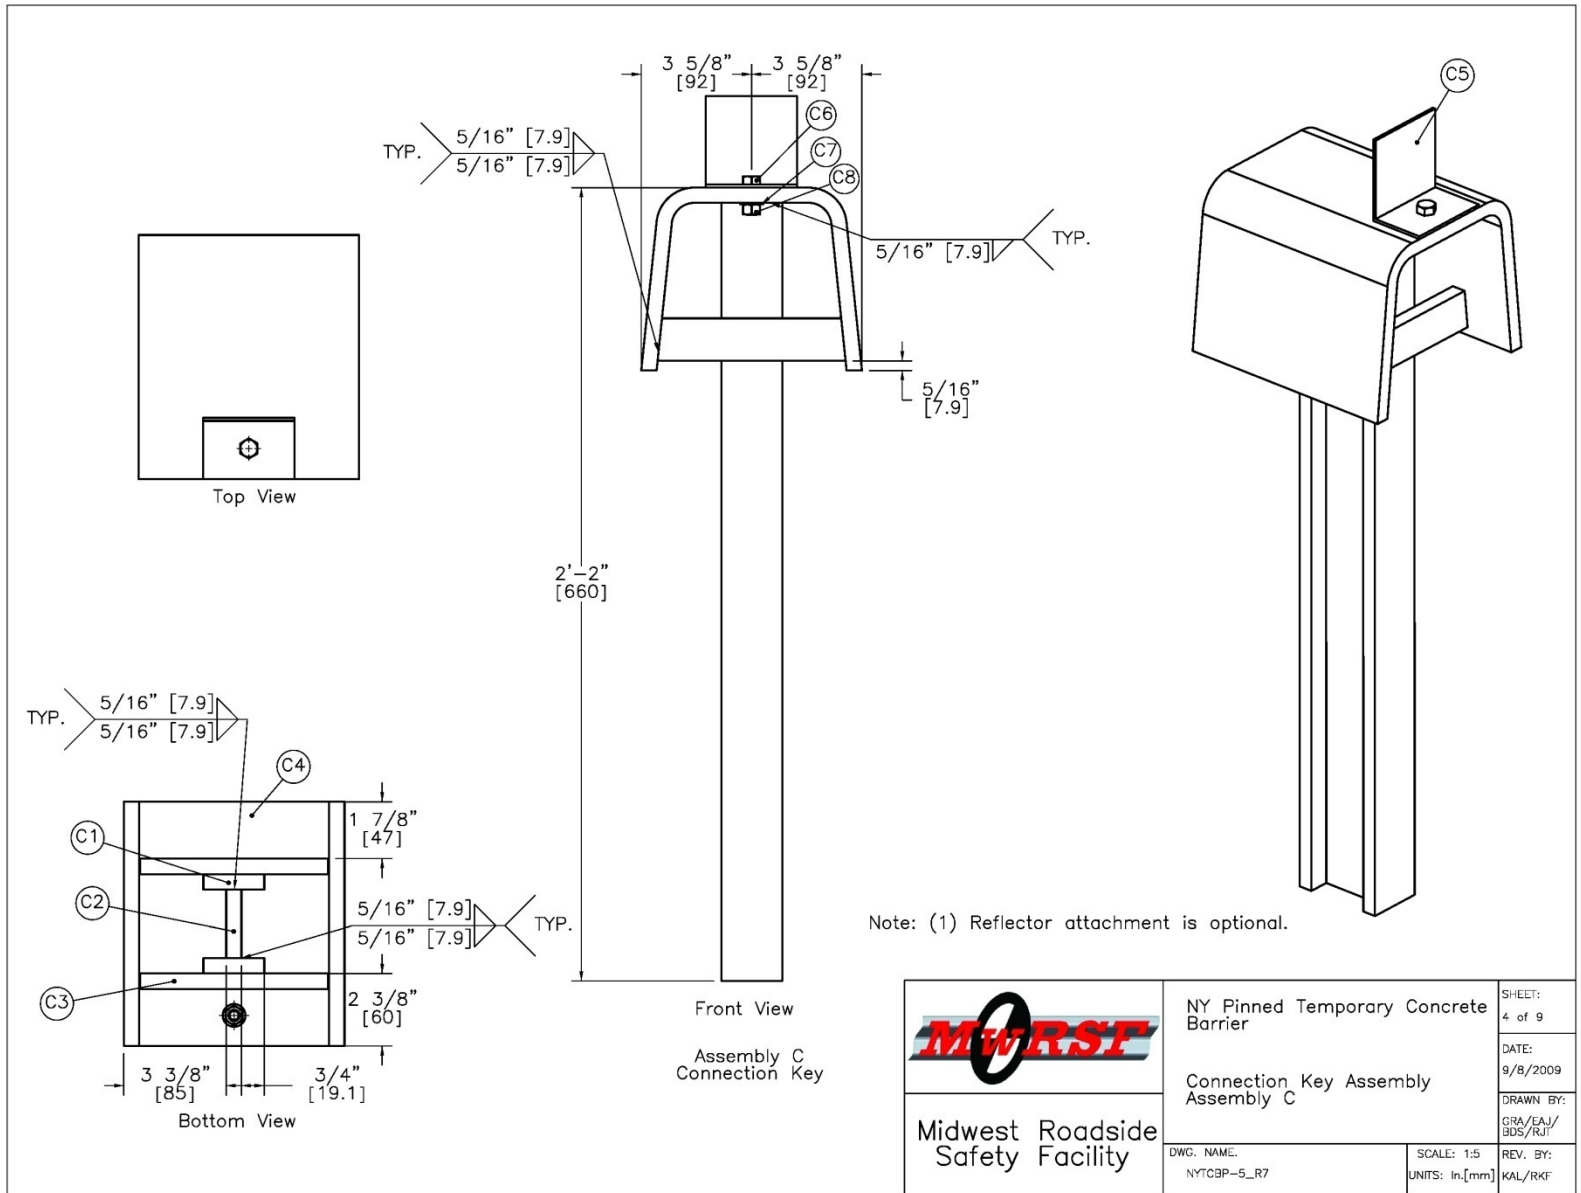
Connection Key Assembly Details, Test No. NYTCB-5
